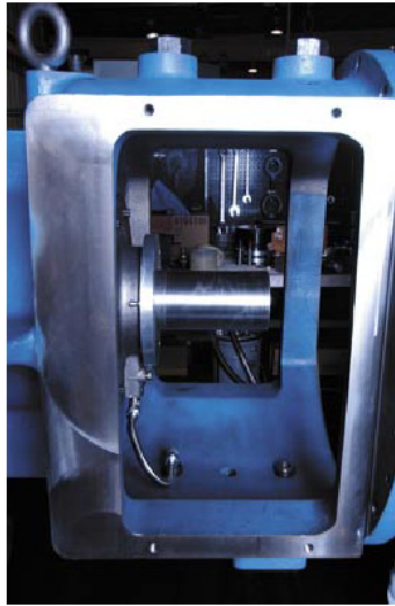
INSTALLING SEAL HOUSING REMOVAL/INSTALLATION TOOL
